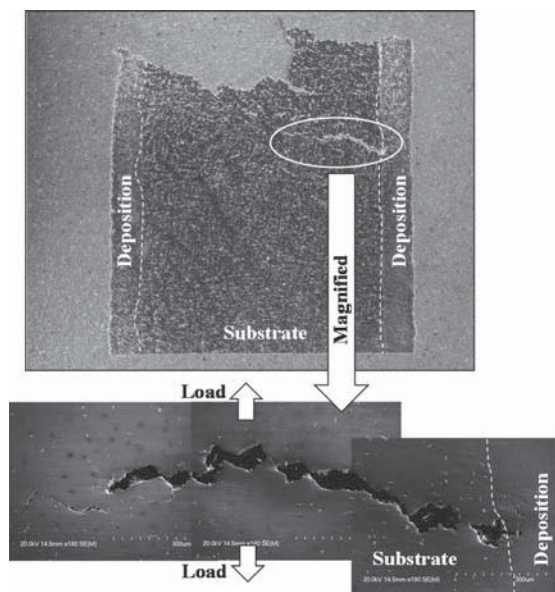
Observation of fracture surface of creep ruptured specimen.
